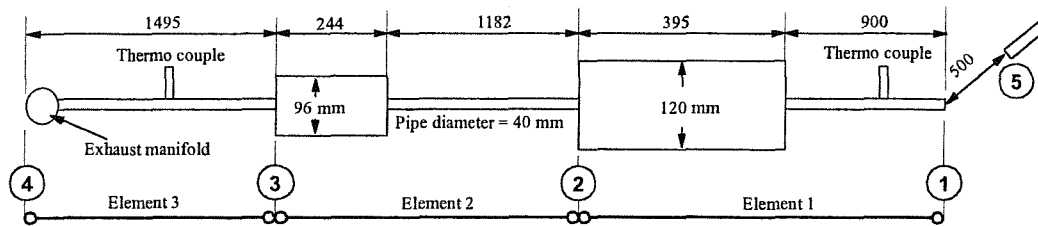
Layout of the optimised exhaust system (all dimensions are in millimetres).
